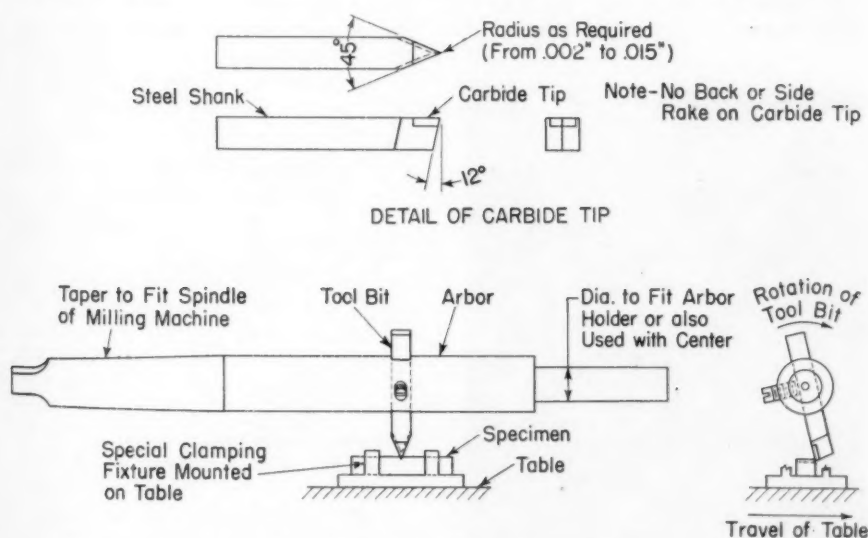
Setup for Notching Charpy Bars with Single Carbide Tip Cutter.
